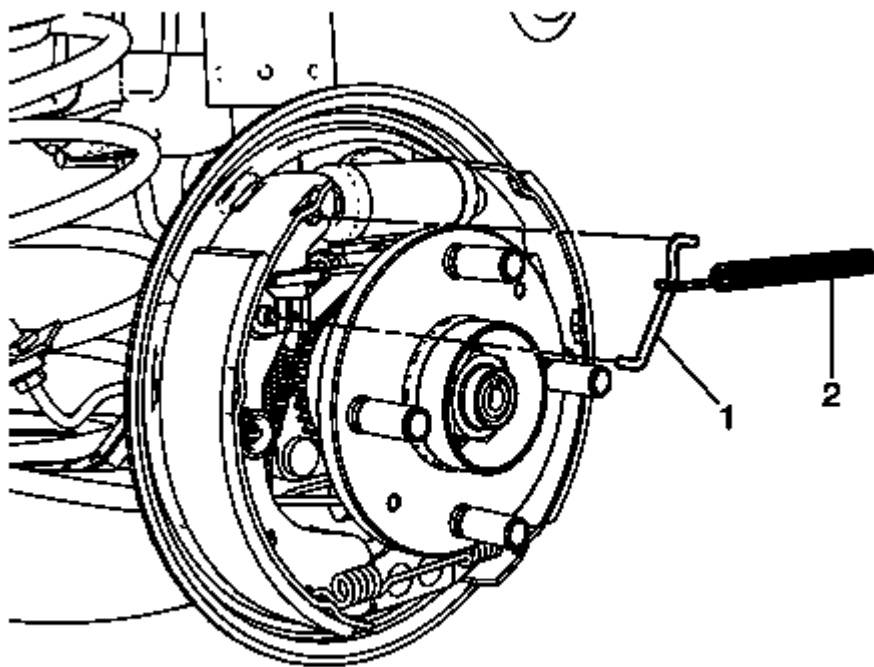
Spring Fastener And Upper Brake Shoe Return Spring
